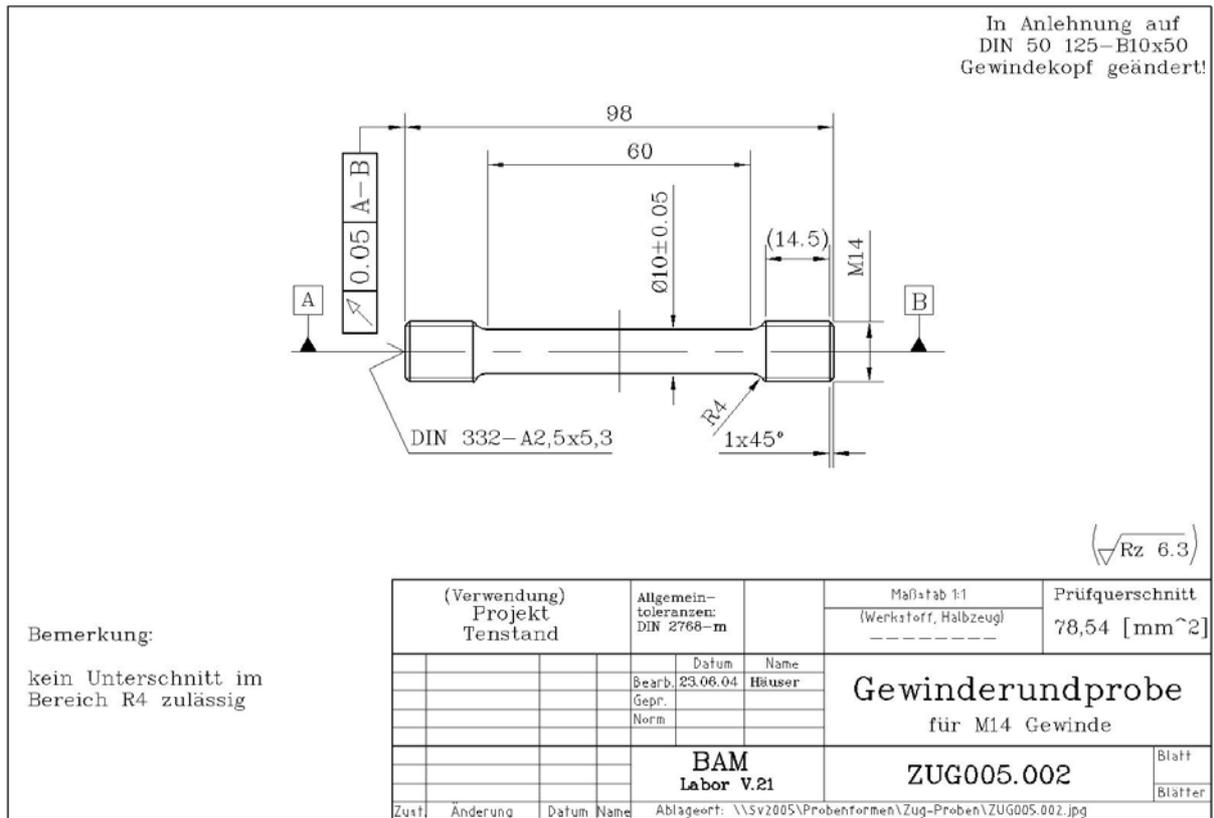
Test piece geometry according to DIN 50125 but with M14 thread for cylindrical threaded samples of Nimonic 75
